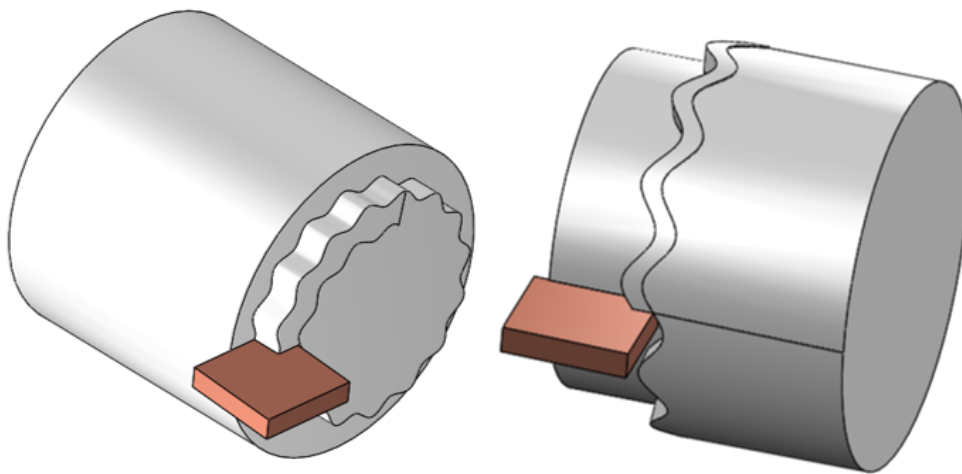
A model of a turning tool in contact with a workpiece. The direction of feed is (a) radial and (b) axial. The inner and outer modulation are both indicated.
